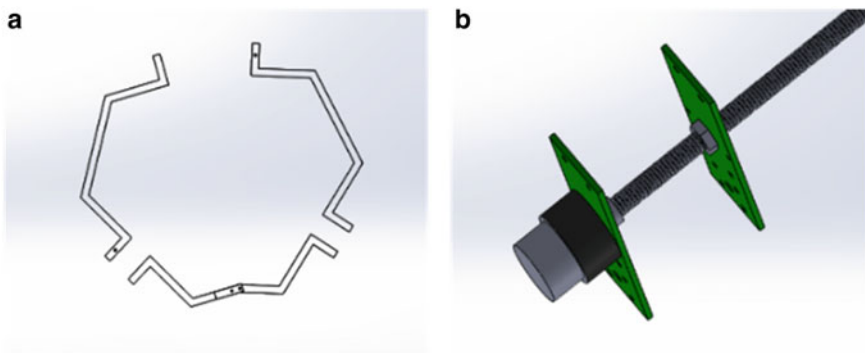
a Hexagonal frame. b Lead screw mechanism
